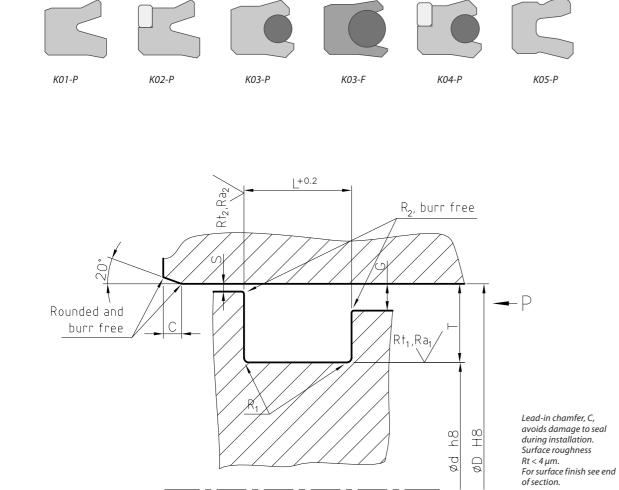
, Housing for piston seals K01, K02, K03, K04, K05.
